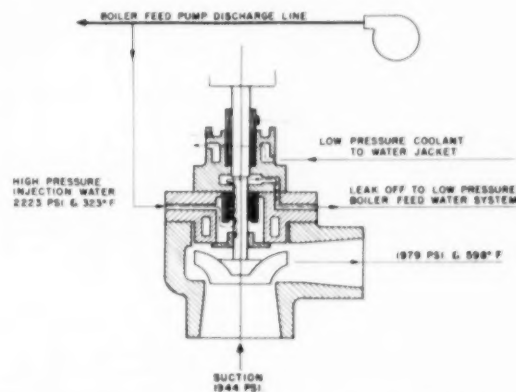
SCHEMATIC ARRANGEMENT OF CIRCULATING-PUMP SEAL
